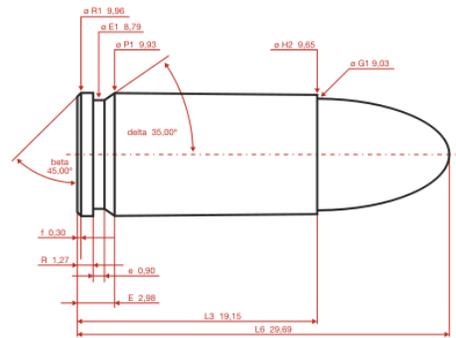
Skematic figure shows the 9mmP, Luger FMJ geometrical dimensions of the
